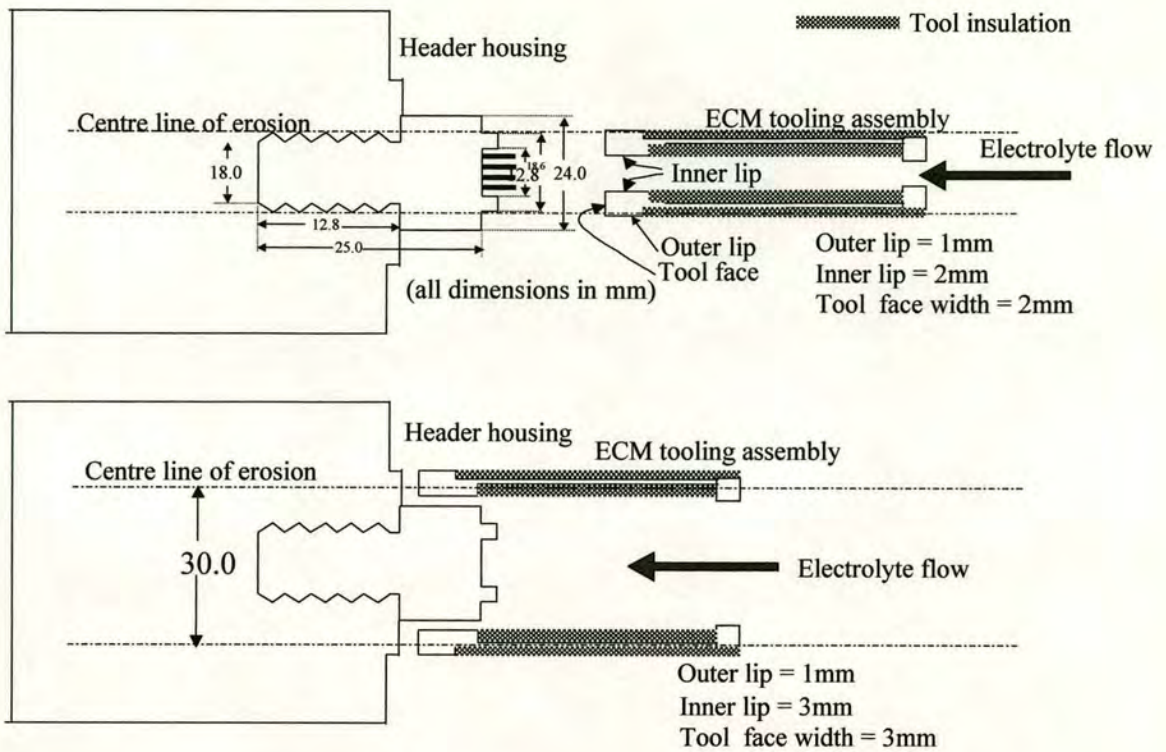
a) direct sinking b) indirect sinking of the tool to remove the plug.
